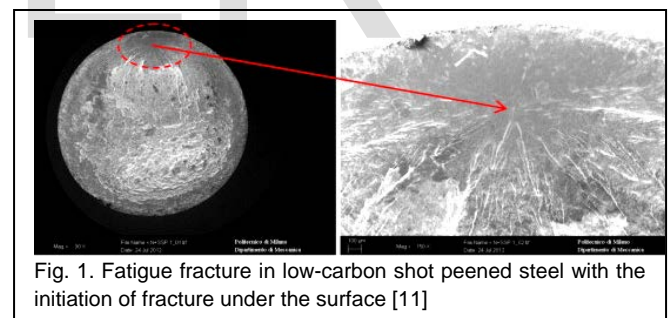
Fatigue fracture in low-carbon shot peened steel with the initiation of fracture under the surface [11]
